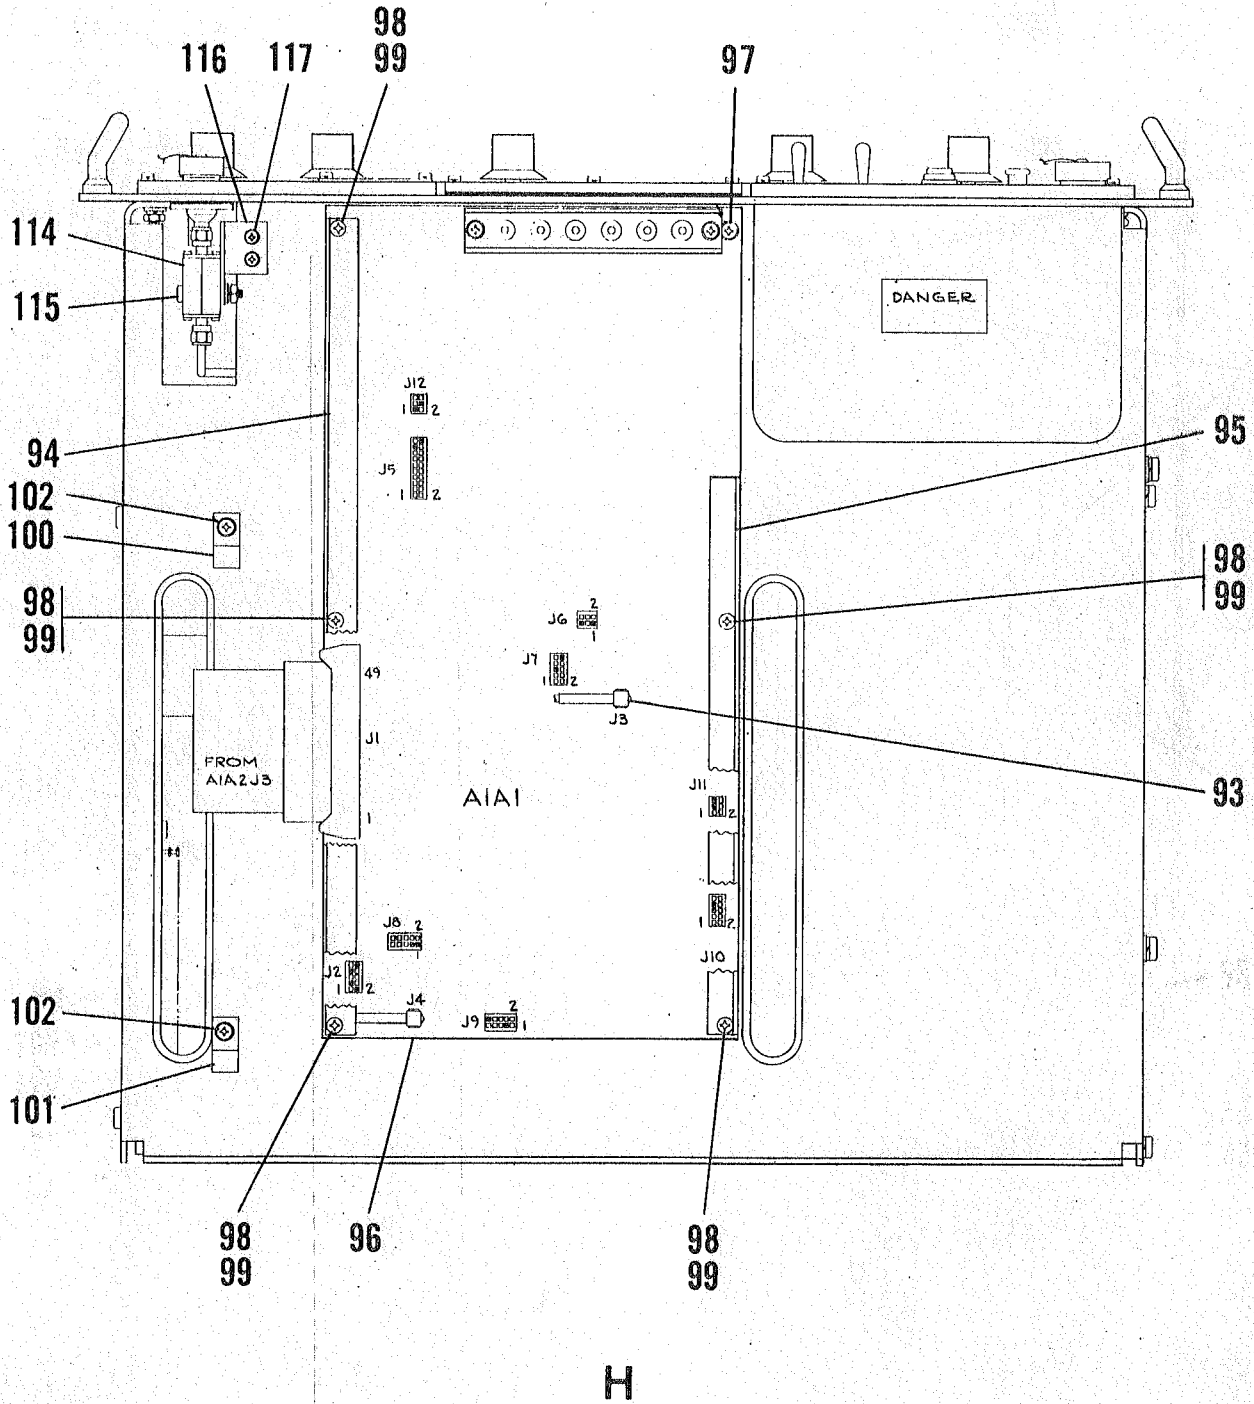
Test Set, Electronics Assembly (Sheet 6 of 6)
